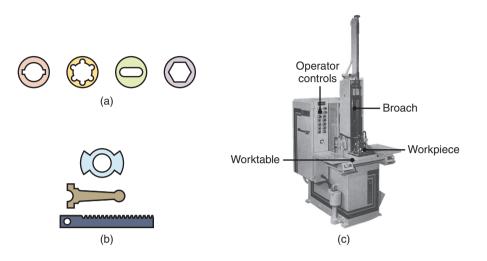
(a) Typical parts made by internal broaching. (b) Parts made by surface broaching. (c) Vertical broaching machine. *Source:* (a) and (b) Courtesy of General Broach and Engineering Company, (c) Courtesy of Ty Miles, Inc.
